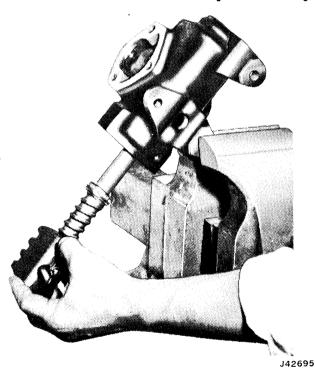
Removing—Installing Wormshaft and Ball Nut
